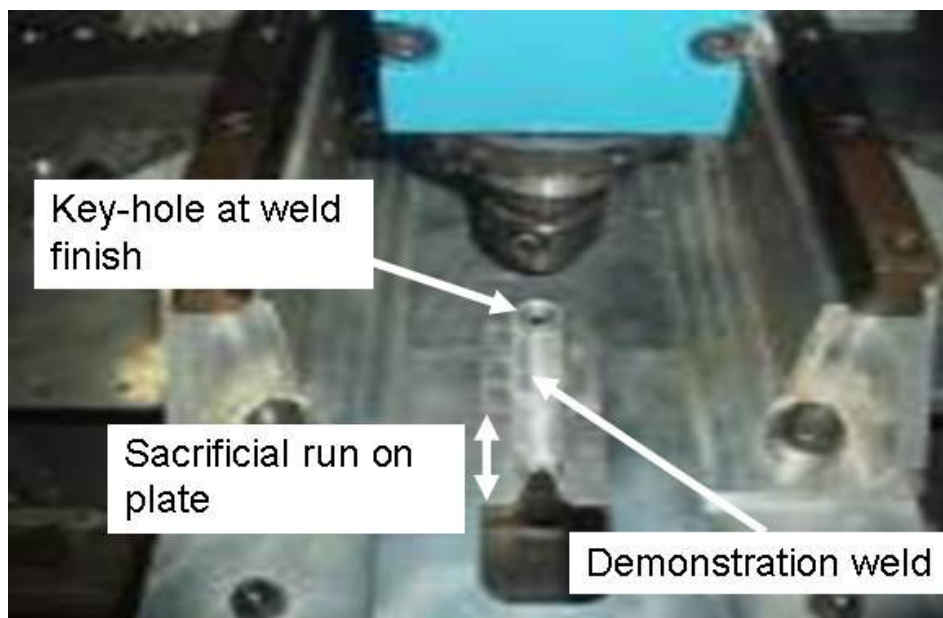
Repair weld over an in-service crack using a bobbin tool
